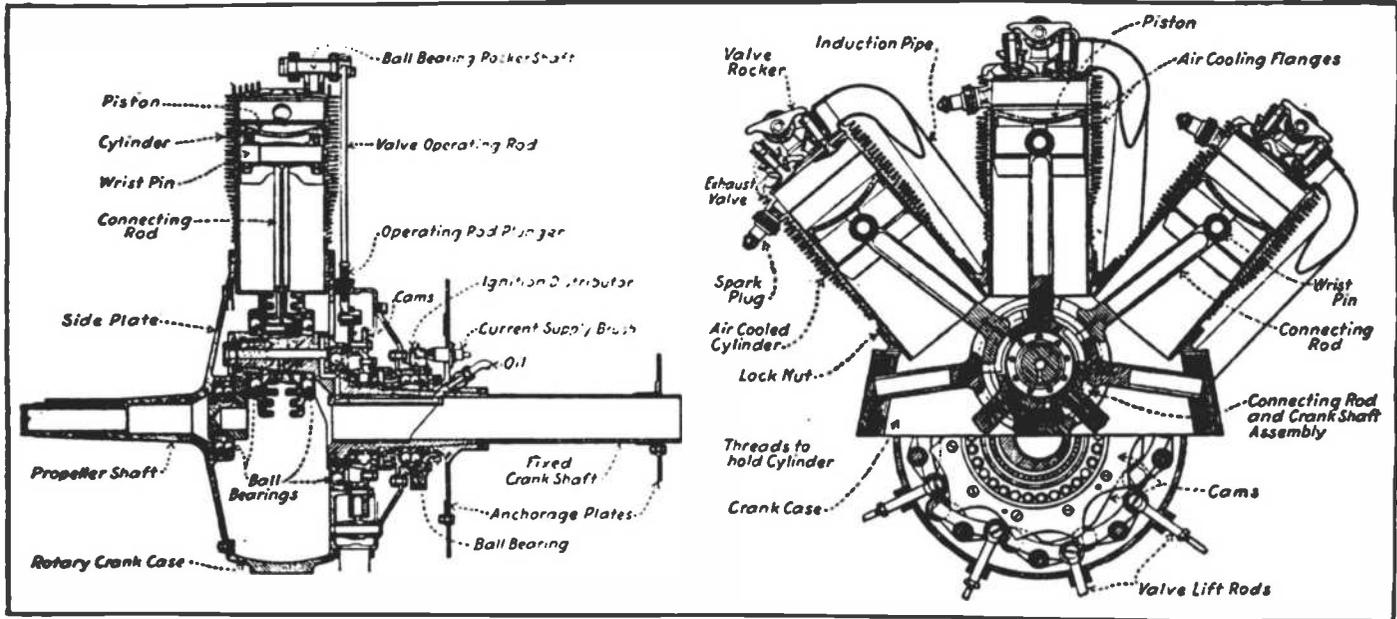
Sectional view of Le Rhone rotary cylinder fixed crankshaft airplane engine, showing novel connecting rod arrangement and method of valve actuation
